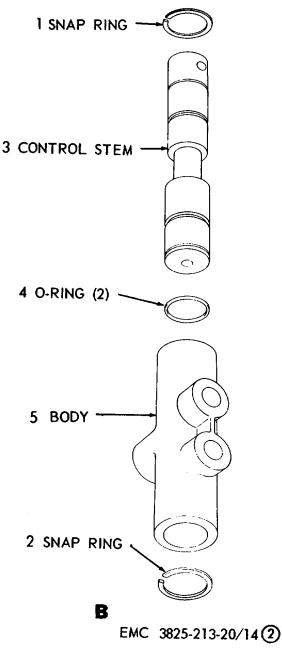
Plow hydraulic control manifold and switch valve assembly, removal and installation.
